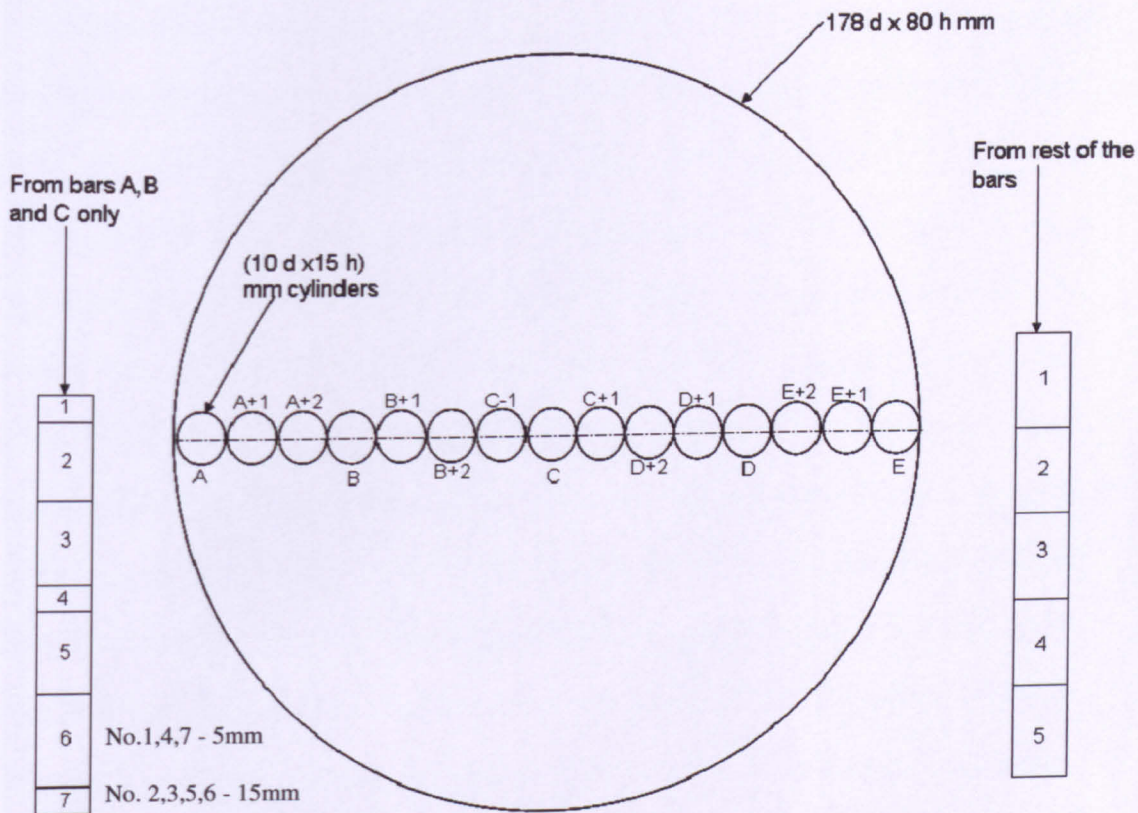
Schematic diagram showing positions of test specimens cut from the as-received ingot; Billet dimensions: 178 mm diameter and 80 mm height.
